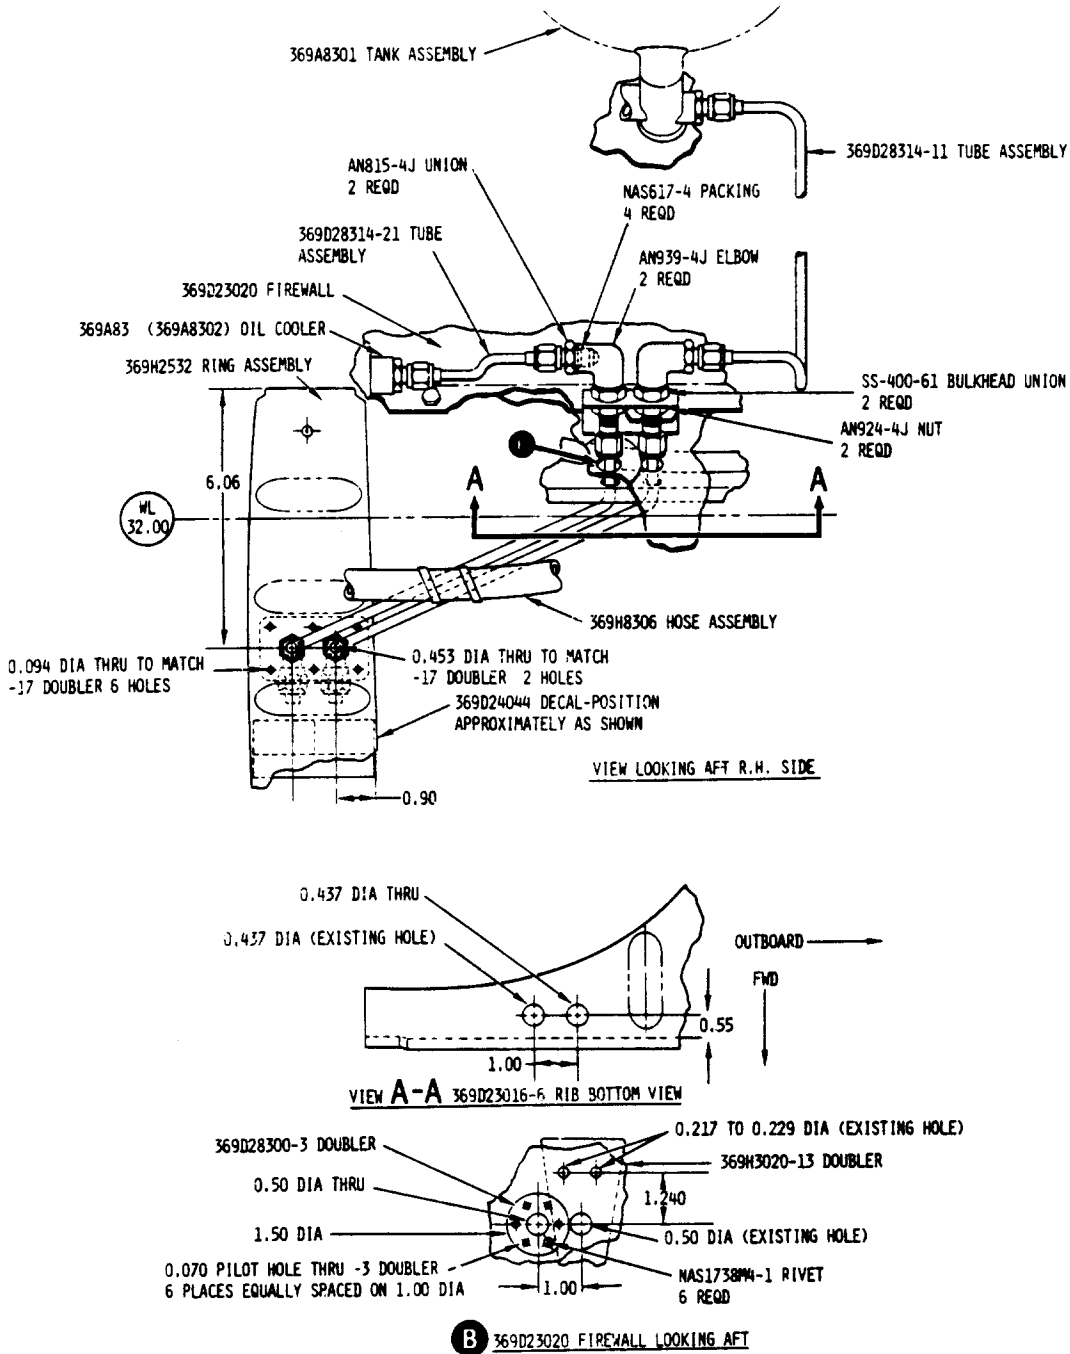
Drain Kit Installation - PN 369D28300-501 Engine Oil Tank and Cooler
